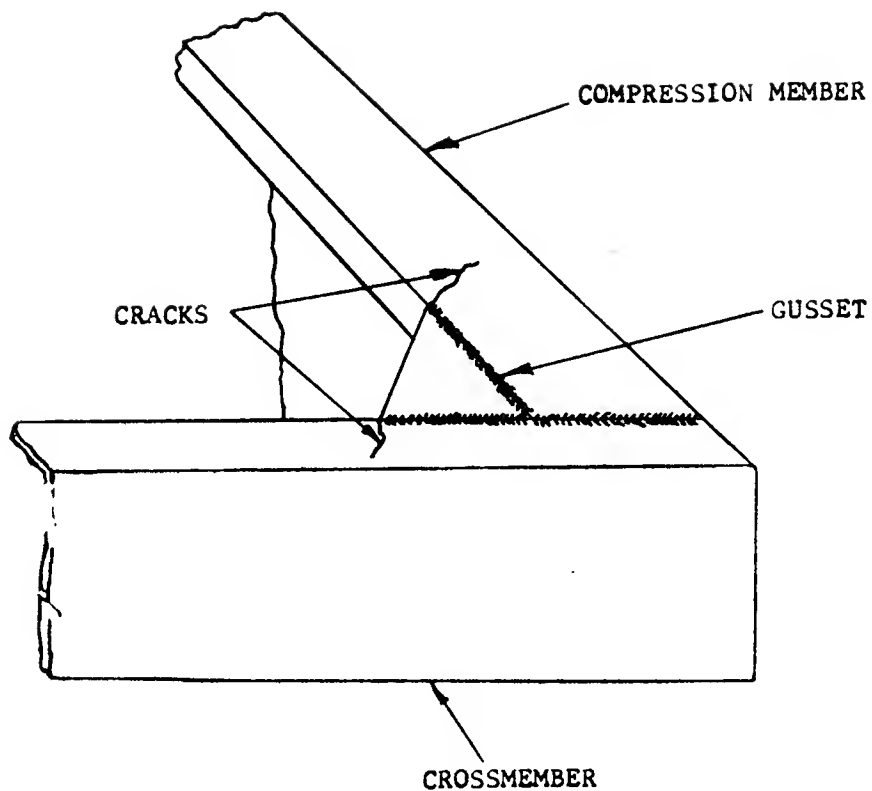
Sketch Showing Cracks at Compression Member to Crossmember Joint Following the Addition of a Gusset.
